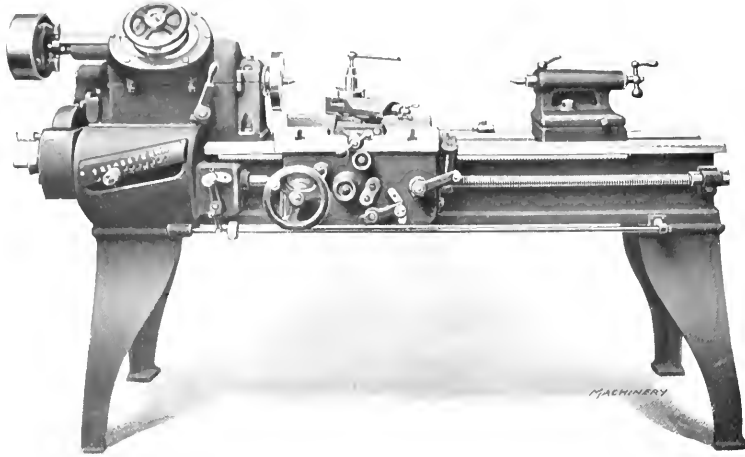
Carroll-Jamieson 14-inch Tool-room and Manufacturing Lathe
